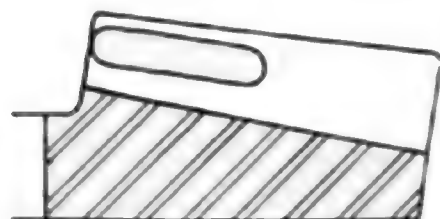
View showing correct tooth contact pattern on bevel gear. Refer to text.
